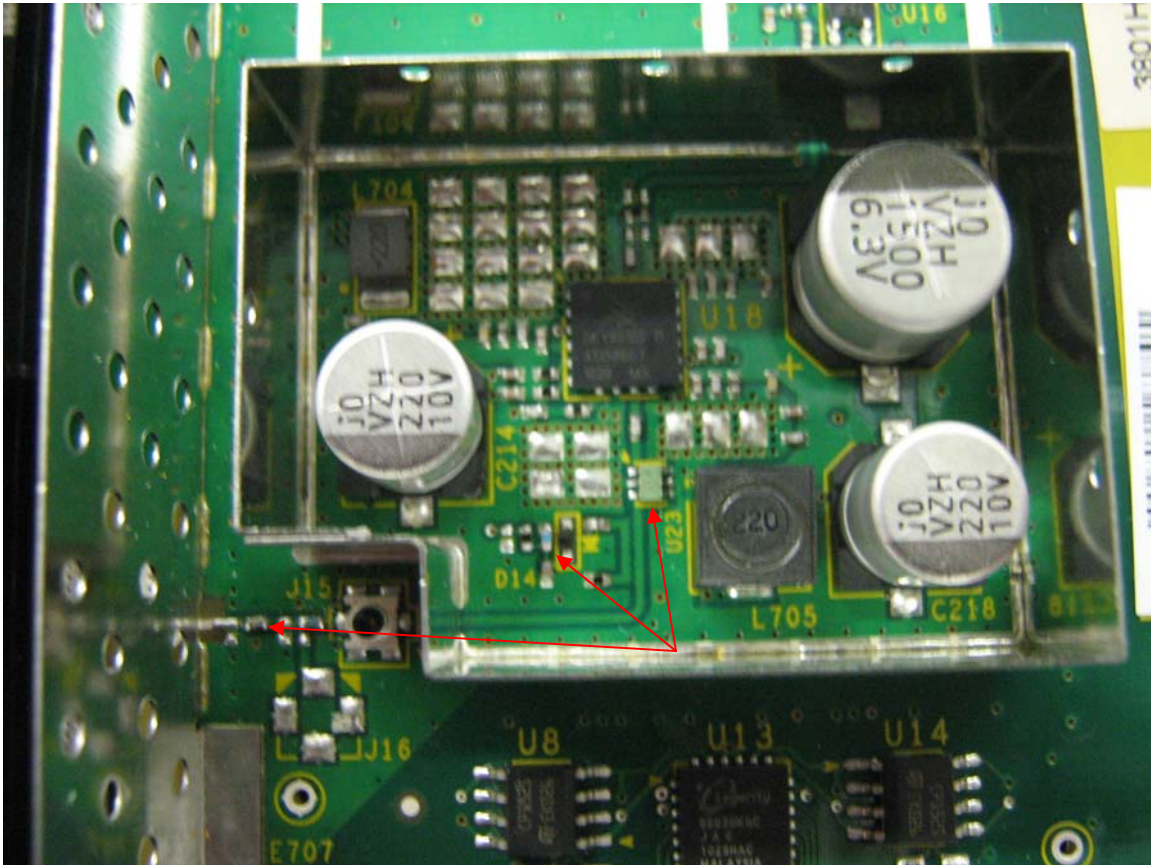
Internal Photo of HomePortal 3801HGV - PCB Board (Front Side)
